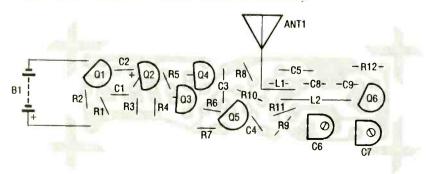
All of the components, with the exception of the battery supply are mounted on the board. Install all of the board-mounted components using this diagram as a guide.
